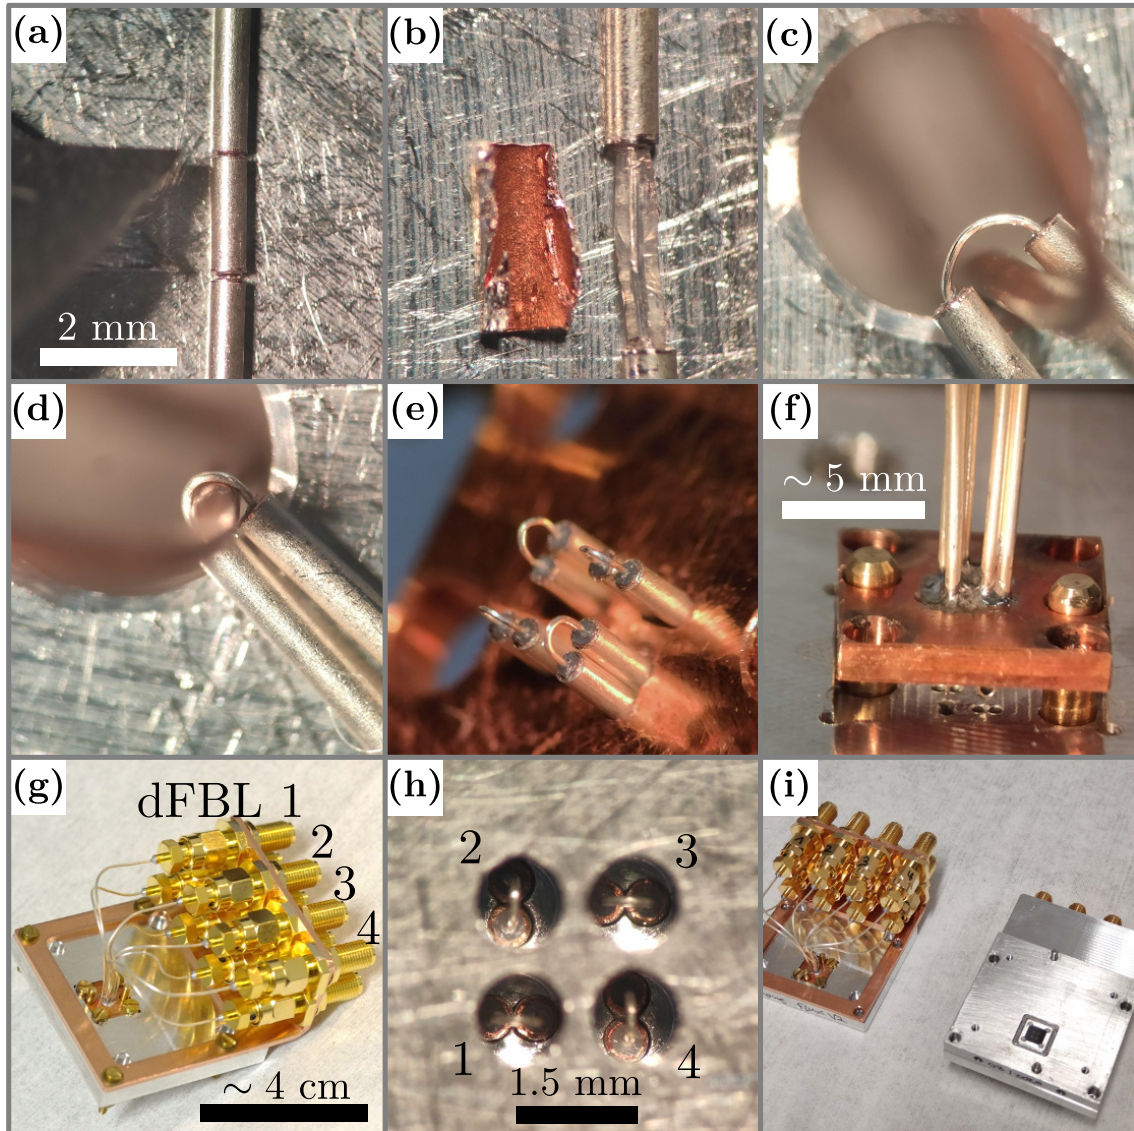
dFBL manufacturing and sample enclosure assembly. (a) A section of predefined length of coaxial cable (type UT-020-CSP) is gently scribed with a razor blade. (b) The outer conductor is removed, revealing the PTFE dielectric and inner conductor. (c)–(d) After carefully removing the PTFE, the bare inner conductor is formed into a reproducible loop shape by bending it around a copper wire. (e) Four dFBL loops are inserted into a copper holding plate and soldered to it. (f) The soldered dFBL assembly is inserted into the lid of the Al sample enclosure. Dowel pins facilitate alignment and prevent the loops from being bent or damaged. (g) dFBLs are connectorized with standard SMA parts and bulkhead mounts. (h) Device-side view of the dFBLs located in their individual ports. (i) The sample enclosure lid with dFBLs (left) is combined with a standard coaxial qubit enclosure as described previously [165], containing the qubit device in a 5×5 (mm)² pocket and four independent coaxial readout lines.
